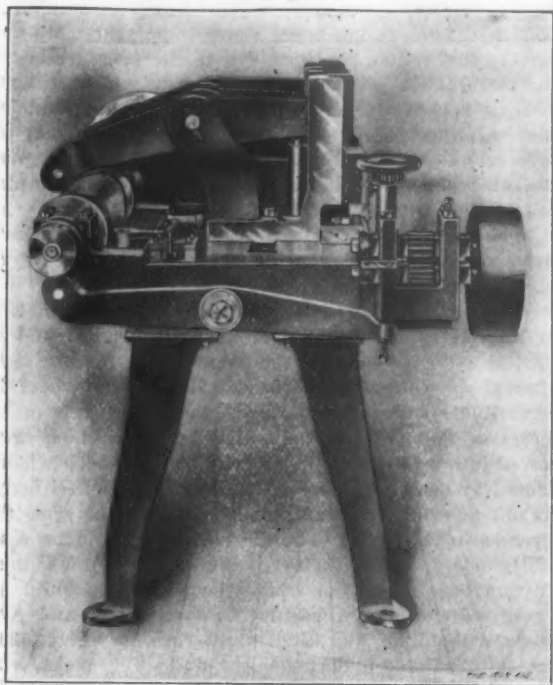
Side View of the Machine, Showing the Feeding Mechanism.
